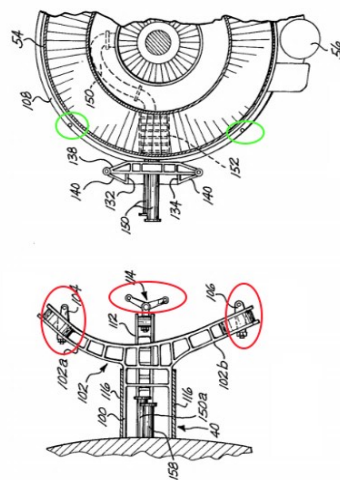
Engine Integration Frame, red circles indicate assembly points structure, green circles indicate assembly points engine [69]
